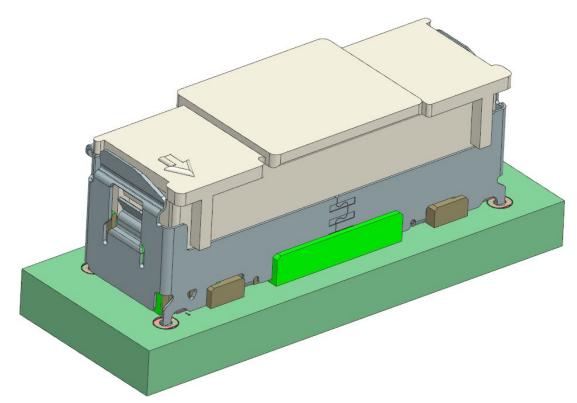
Fixed-Side Connector with Vacuum Cap
